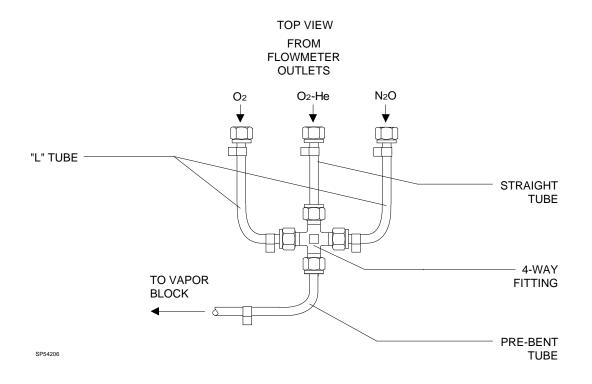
THREE-GAS MANIFOLD ASSEMBLY
